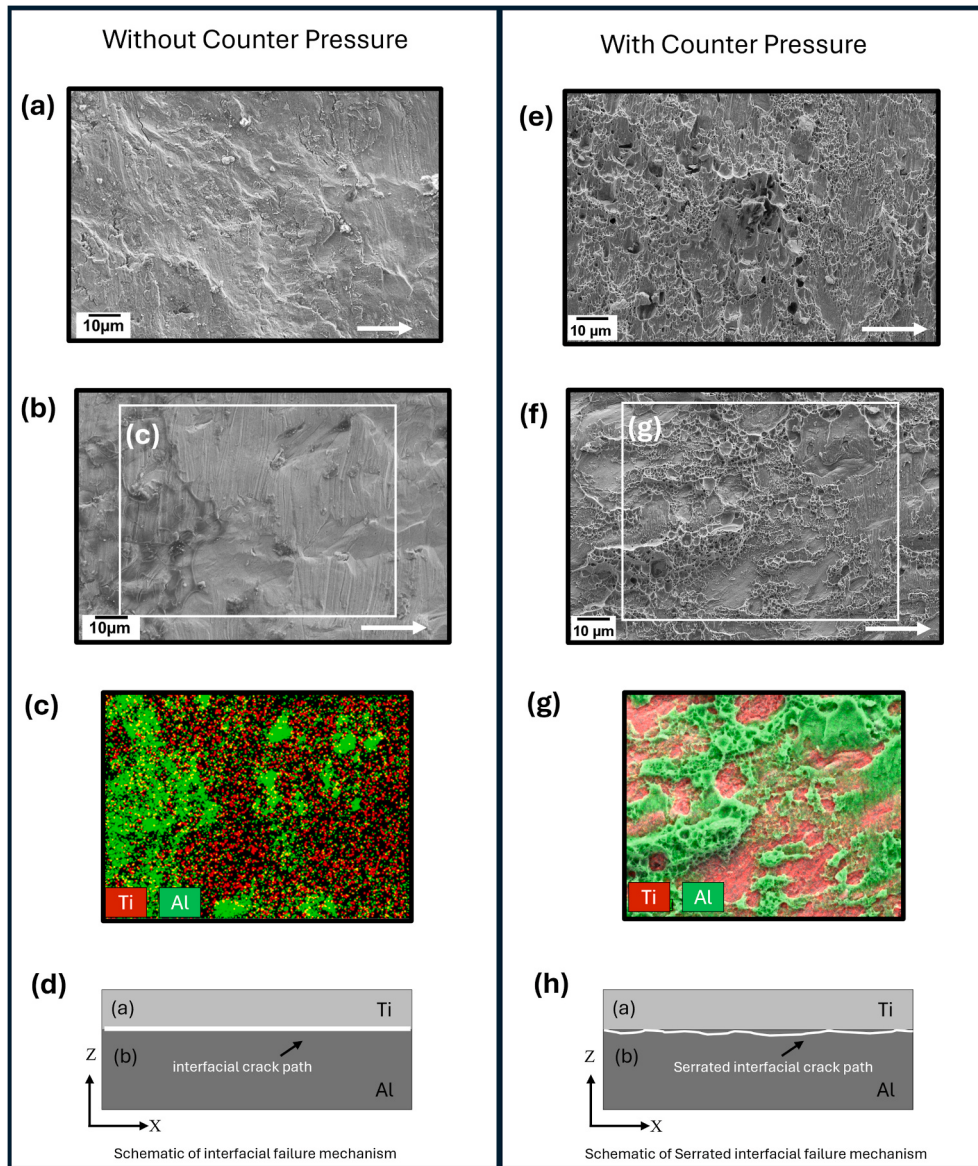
Fractography of failure surfaces (in the X-Y plane) after the single lap shear test corresponding to the spot weld FMB specimen (a) Aluminum surface without counter-pressure and (b) Titanium surface without counter-pressure showing brittle cleavage features; (c) EDX map on the titanium side surface corresponding to the box in b; (d) schematic representation of crack propagation in the sample without counter-pressure based on fractography. (e) Fractography observations of failure surfaces (in the X-Y plane) after the single lap shear test corresponding to the spot weld FMB specimen with counter-pressure on the aluminum surface and (f) Titanium surface with white arrows indicating the direction of crack propagation; (g) EDX map of the titanium side surface corresponding to the box in f; and (h) schematic representation of crack propagation in the sample with counter-pressure based on fractography.
